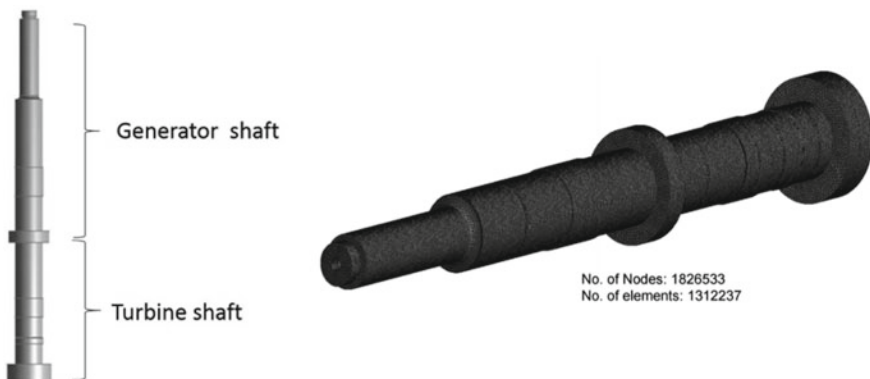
3D geometry and discretized geometry of integrated Turbine-Generator shaft
